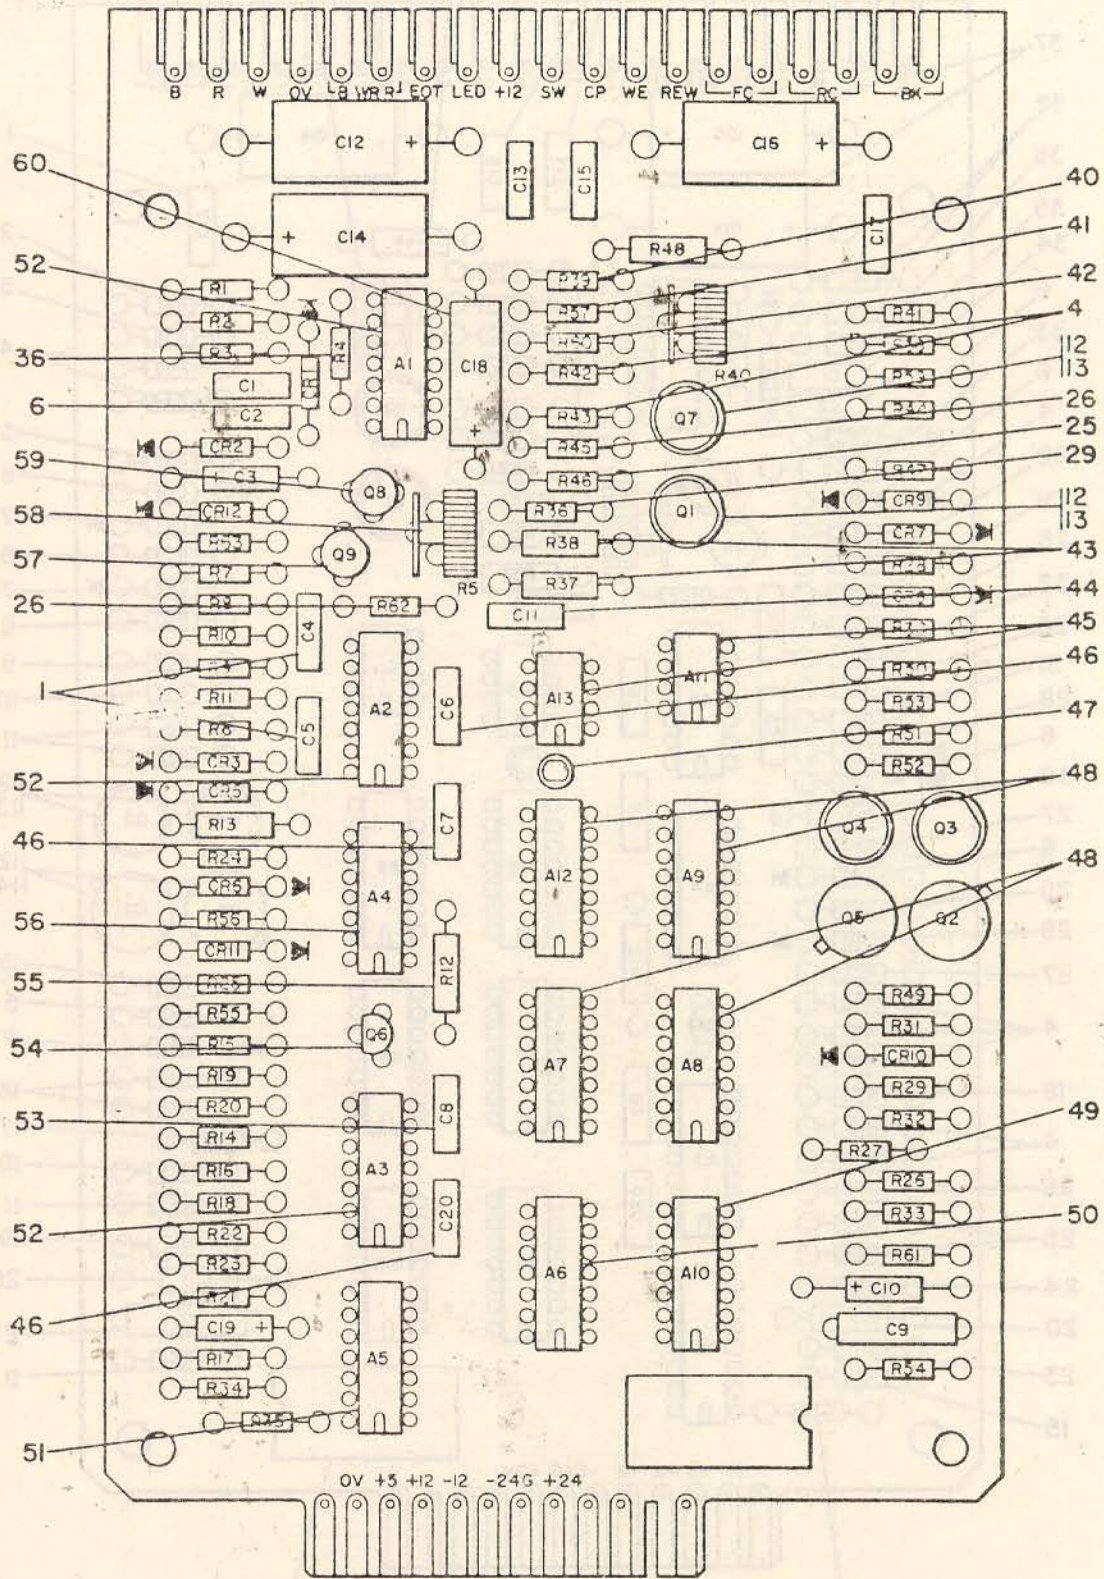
Tape Local Electronic, PC Card (Sheet 2 of 2)
